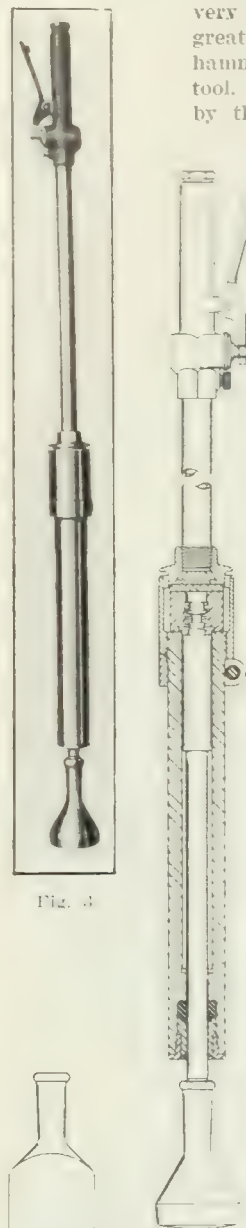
Exterior and Sectional Views of the Cleveland Pneumatic Rammer.
